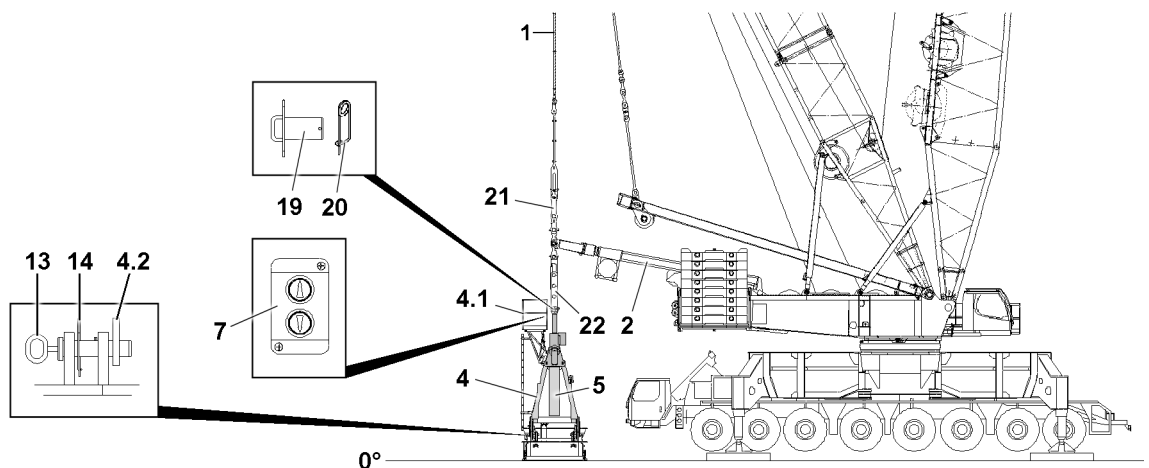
Installing the divisible ballast pallet „VarioTray“ on the suspended ballast guide
